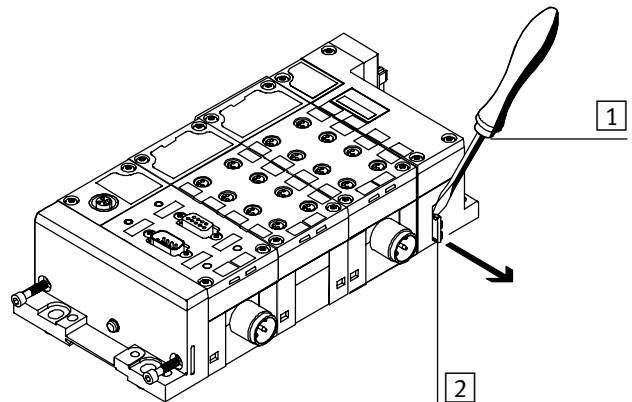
/5: Fastening plate and locking plate in the pneumatic interface
